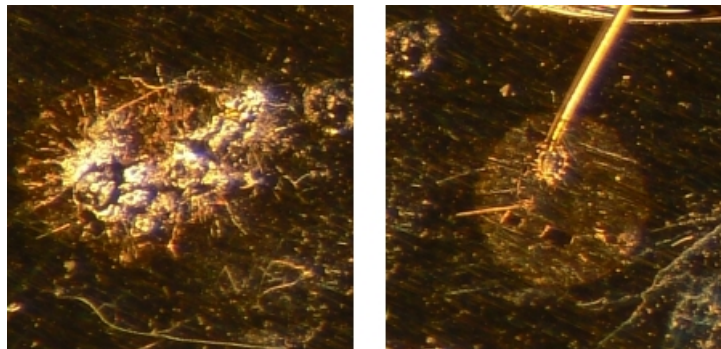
Left: A contact pad damaged by sparks from the spot-welder. Right: An undamaged contact pad with gold wire.
